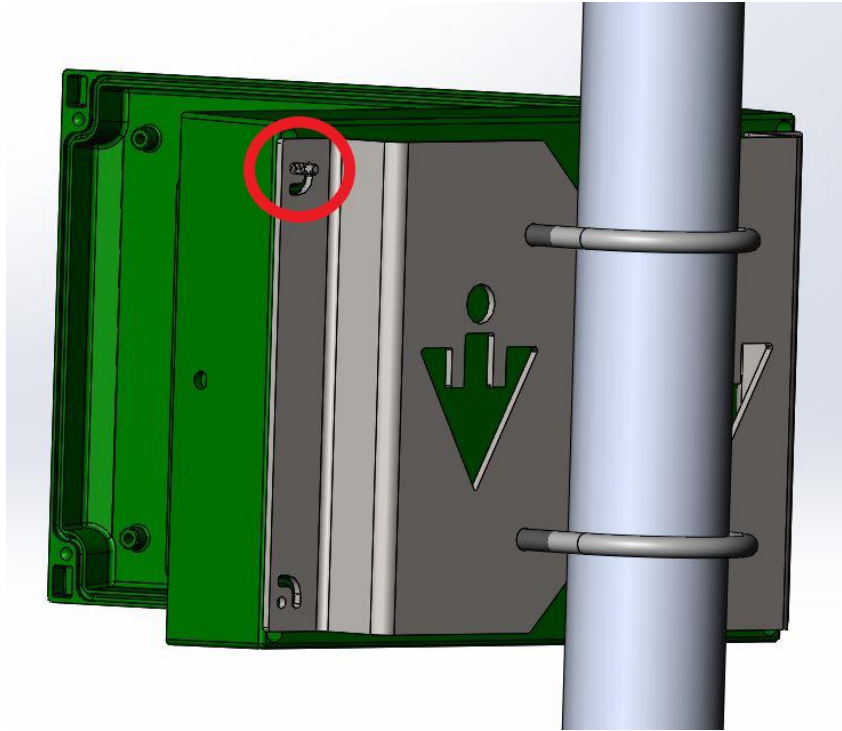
Feeding Screw Through Enclosure and Mounting Bracket
